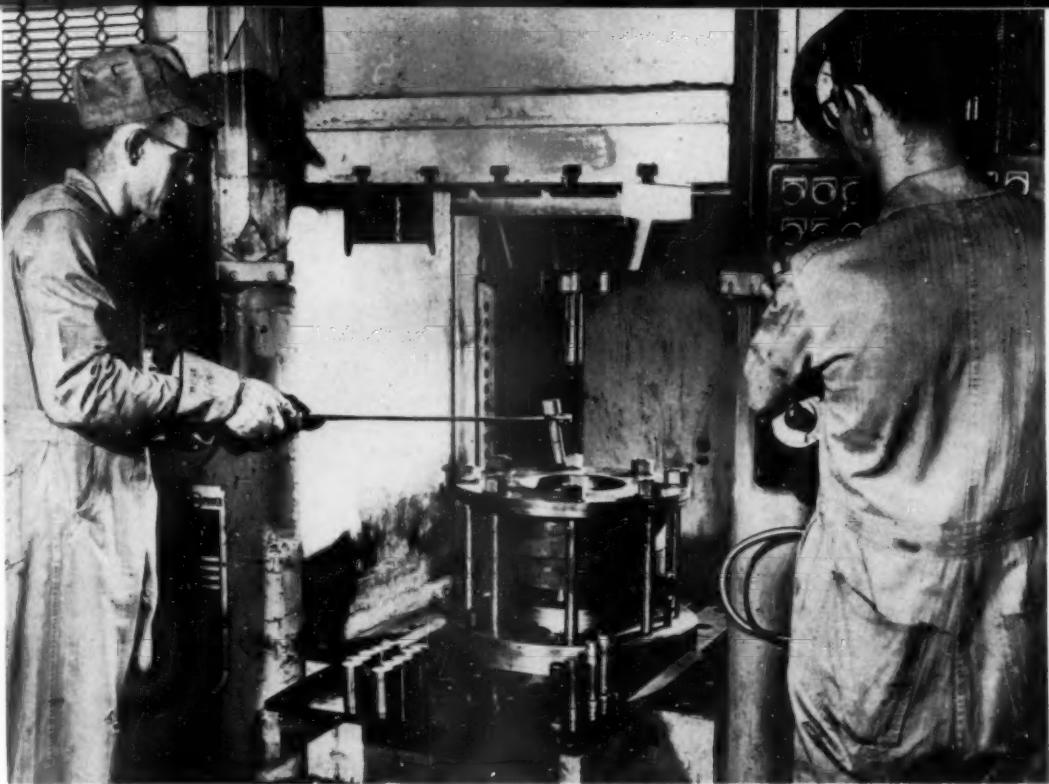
Experimental extrusion of unalloyed titanium is performed on a 700-ton hydraulic press.
